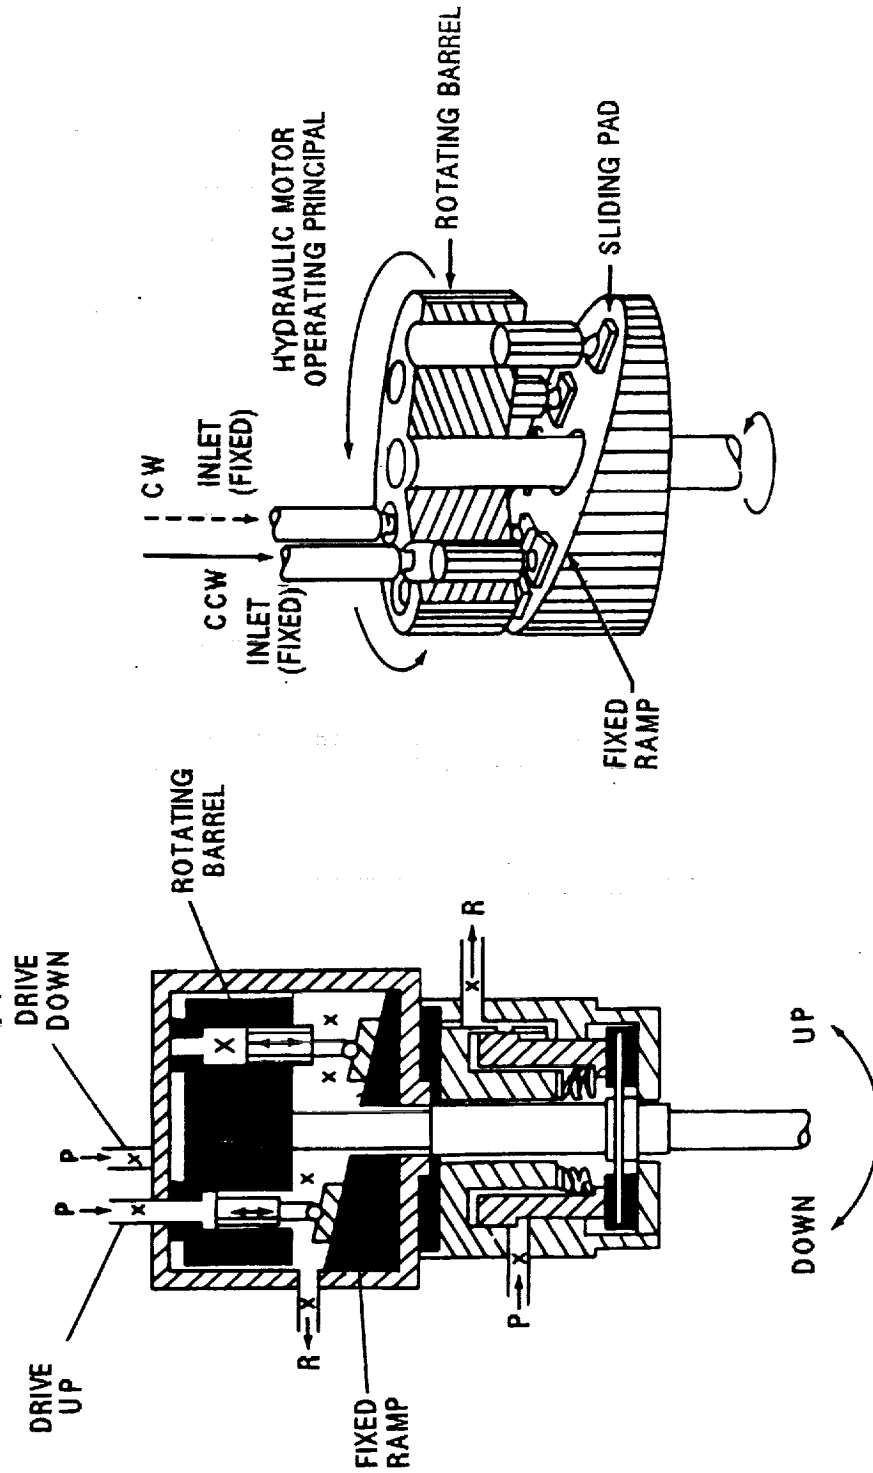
HYDRAULIC MOTOR/BRAKE ASSEMBLY
